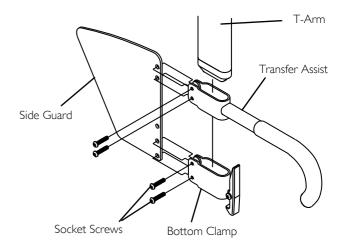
Adjusting T-arm Transfer Assists and/or Side Guards
